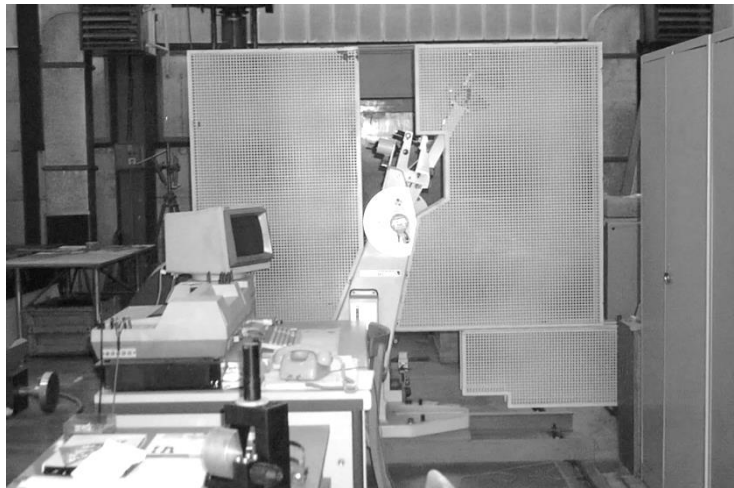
Instrumented Charpy pendulum SCHENCK TREBEL 150/300 J
